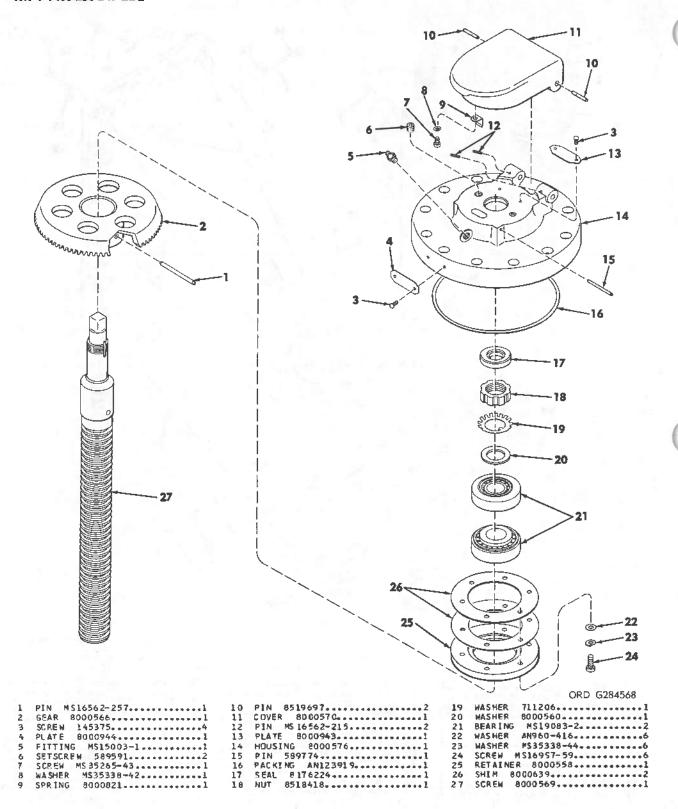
COVER /8000577/-EXPLODED VIEW /SEE FIGURE 242 FOR NEXT HIGHER ASSEMBLY/
